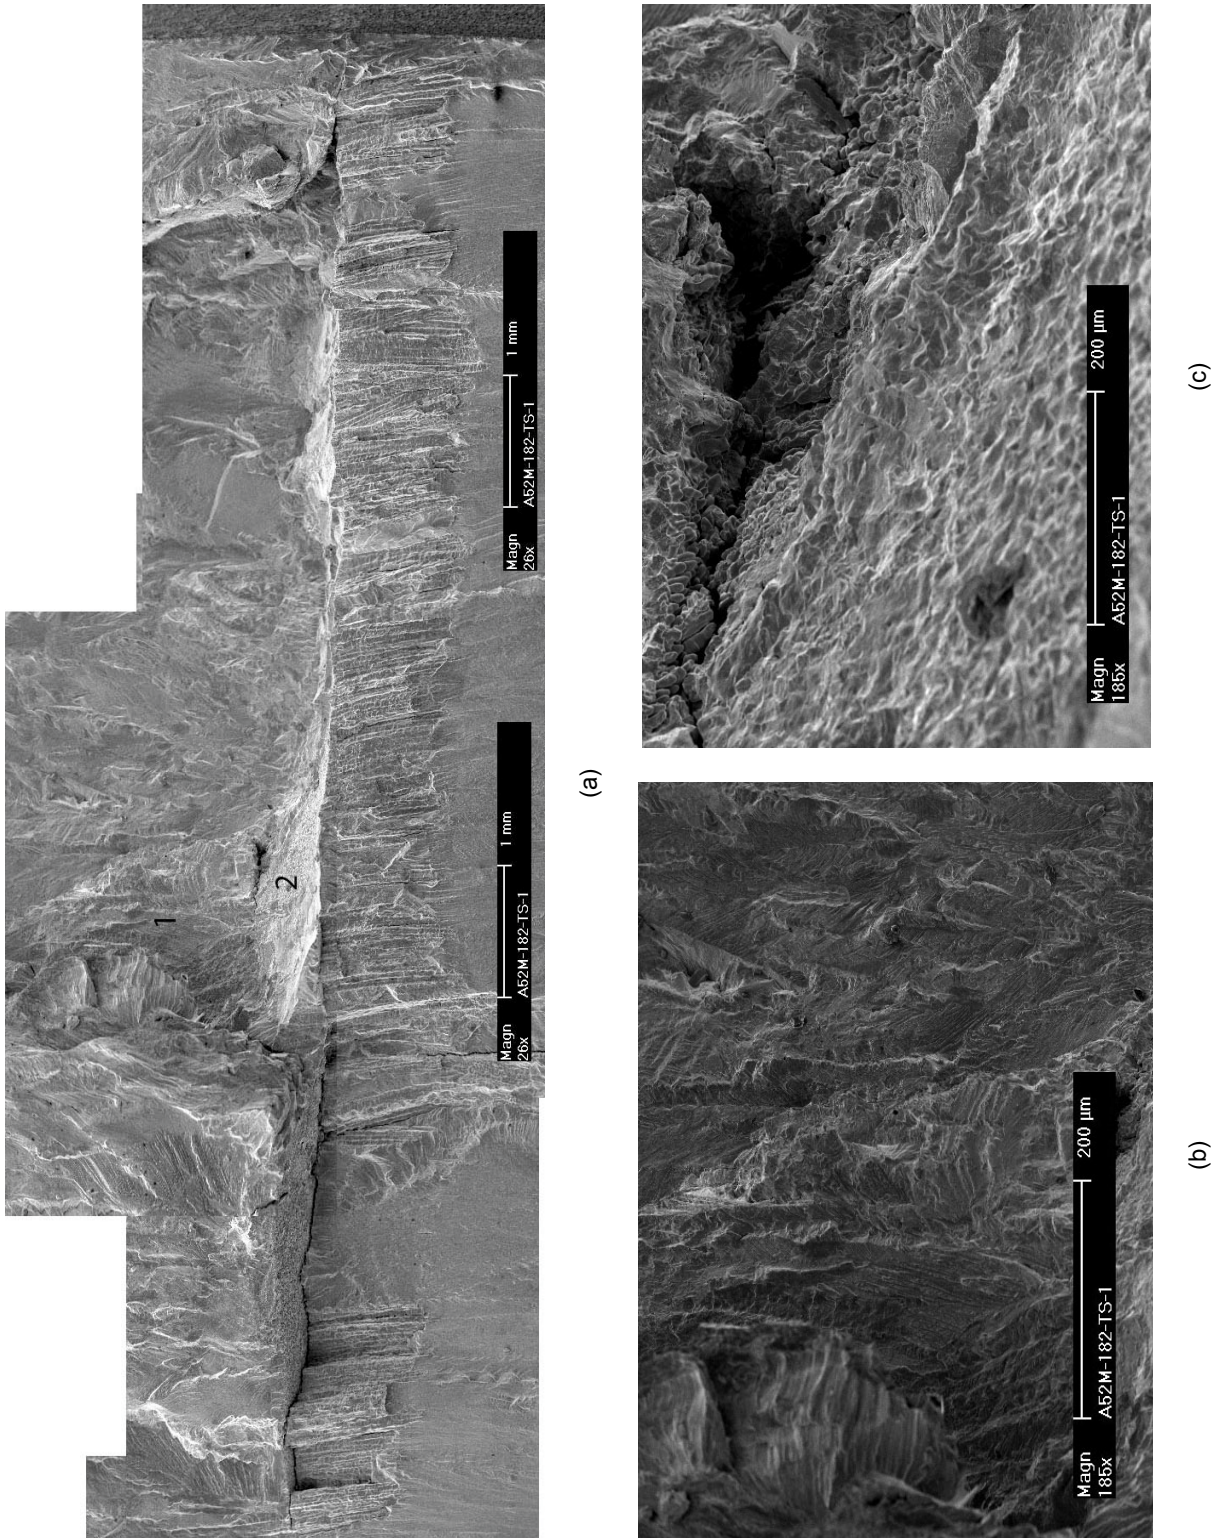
Specimen A52M-182-TS-1: (a) second half of fracture surface, (b) detail at location 1, and (c) detail at location 2. Crack advance is from bottom to top.
